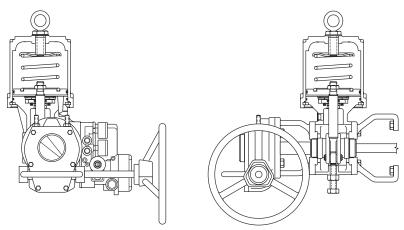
Auxiliary rotary declutchable handwheel mounted on a rotary actuator (two views). (*Courtesy of Valtek International*)
